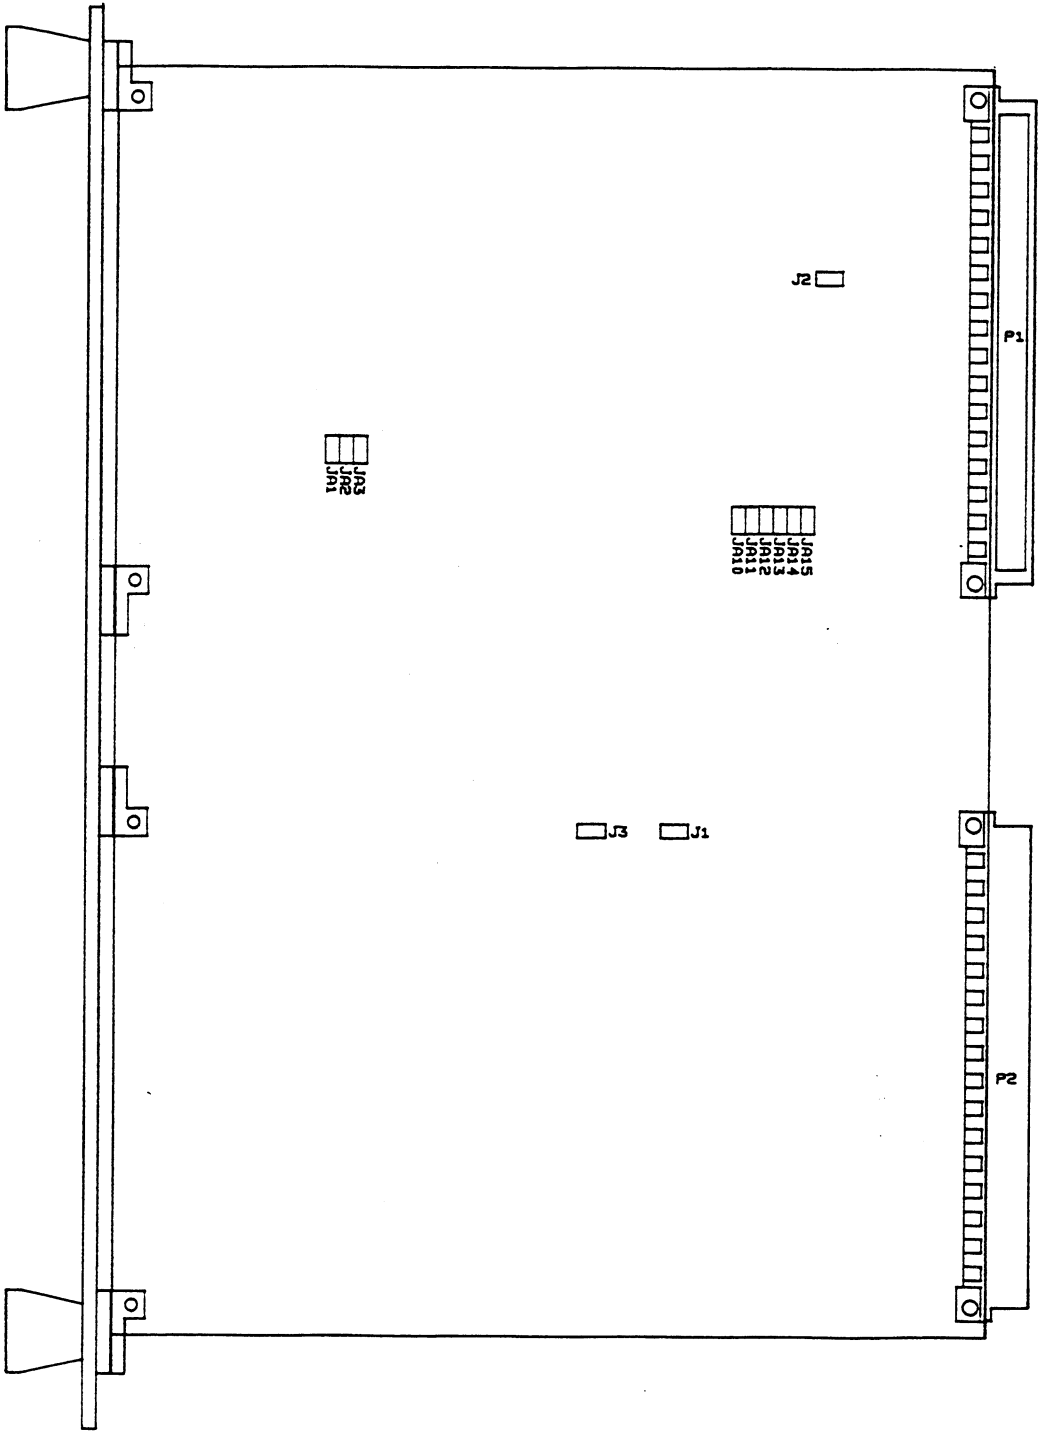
Jumper/Connector Locations on the XVME-290/1 DIO Module
